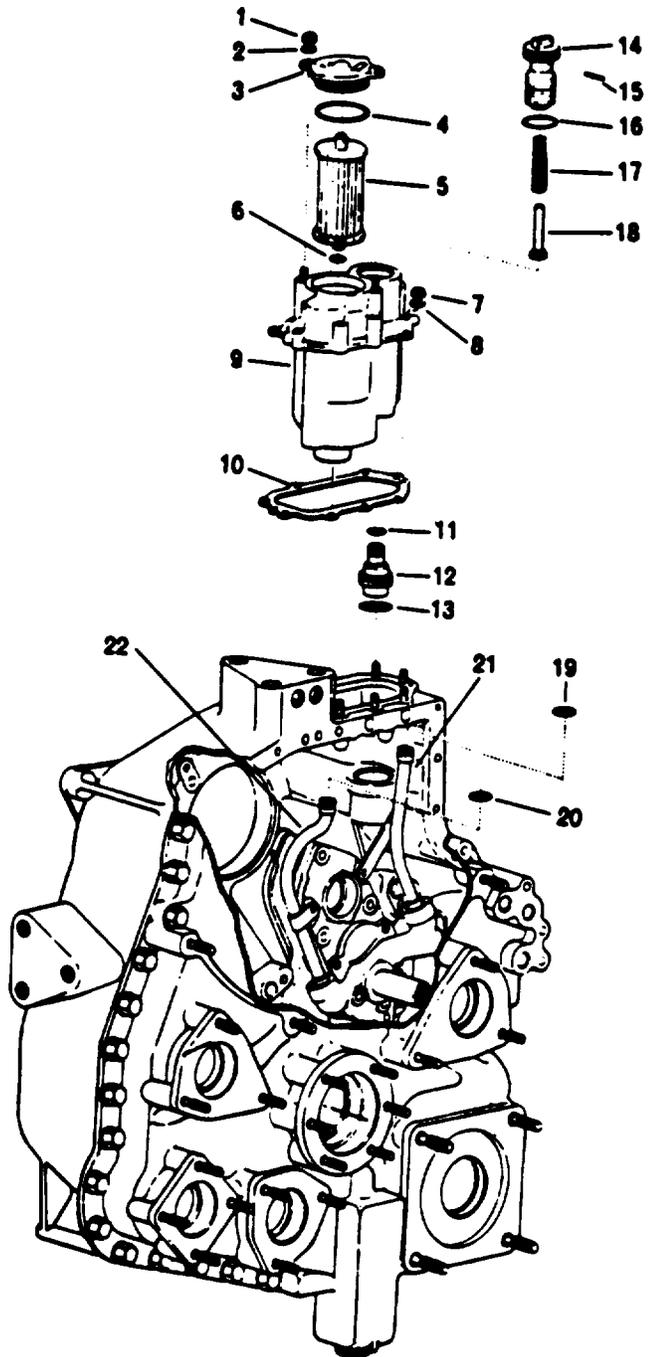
Oil Filter, Housing, Check Valve, and Regulator Value
